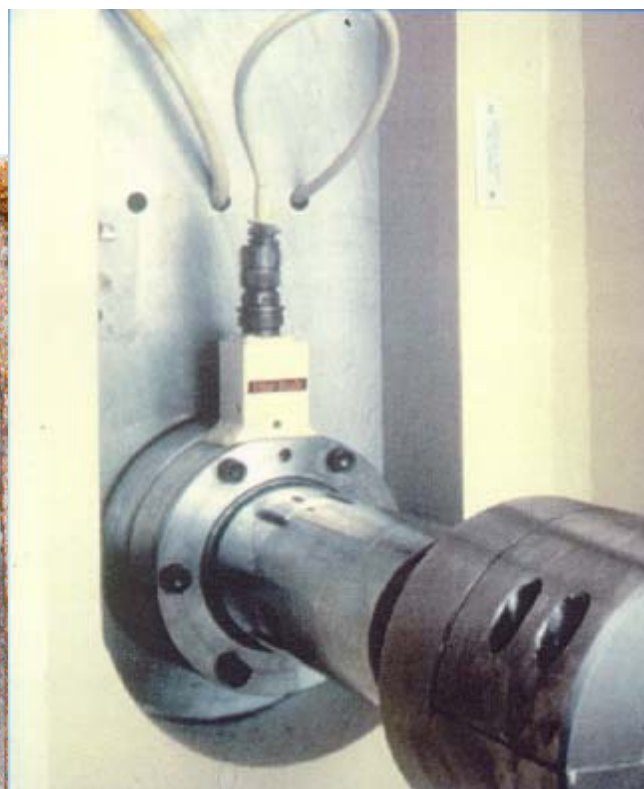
Mounting Sensor to Modified Piston Rod
